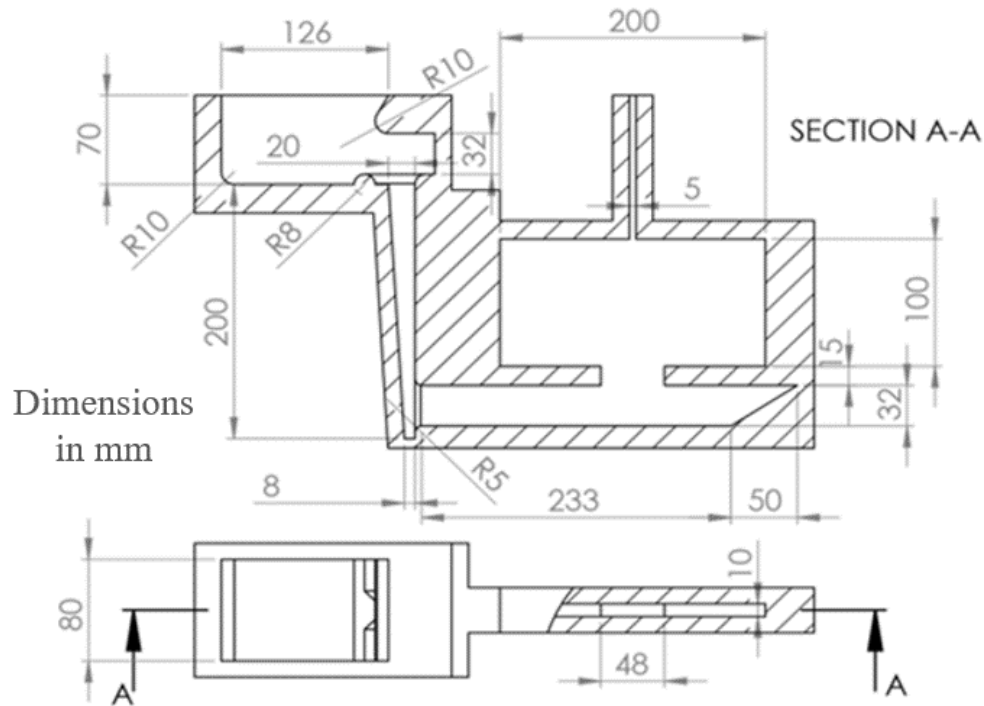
Dimensions of straight-gating system and casting. Aluminum alloy 319 cast plates - 15mm thick and gray iron - 10mm thick
